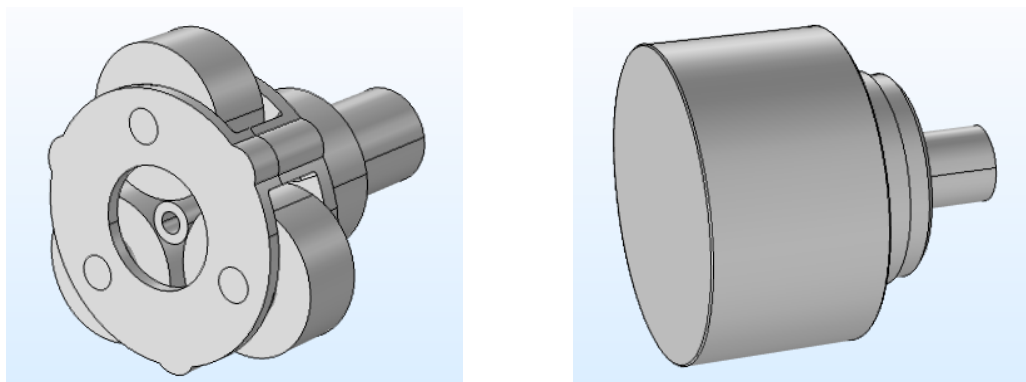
simplified geometry of the 3D model: carrier shaft of the first stage and gearbox case
